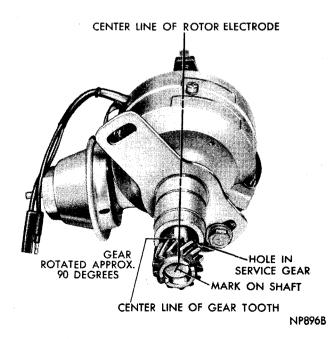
Aligning Gear Teeth With Center Line of Rotor Electrode
